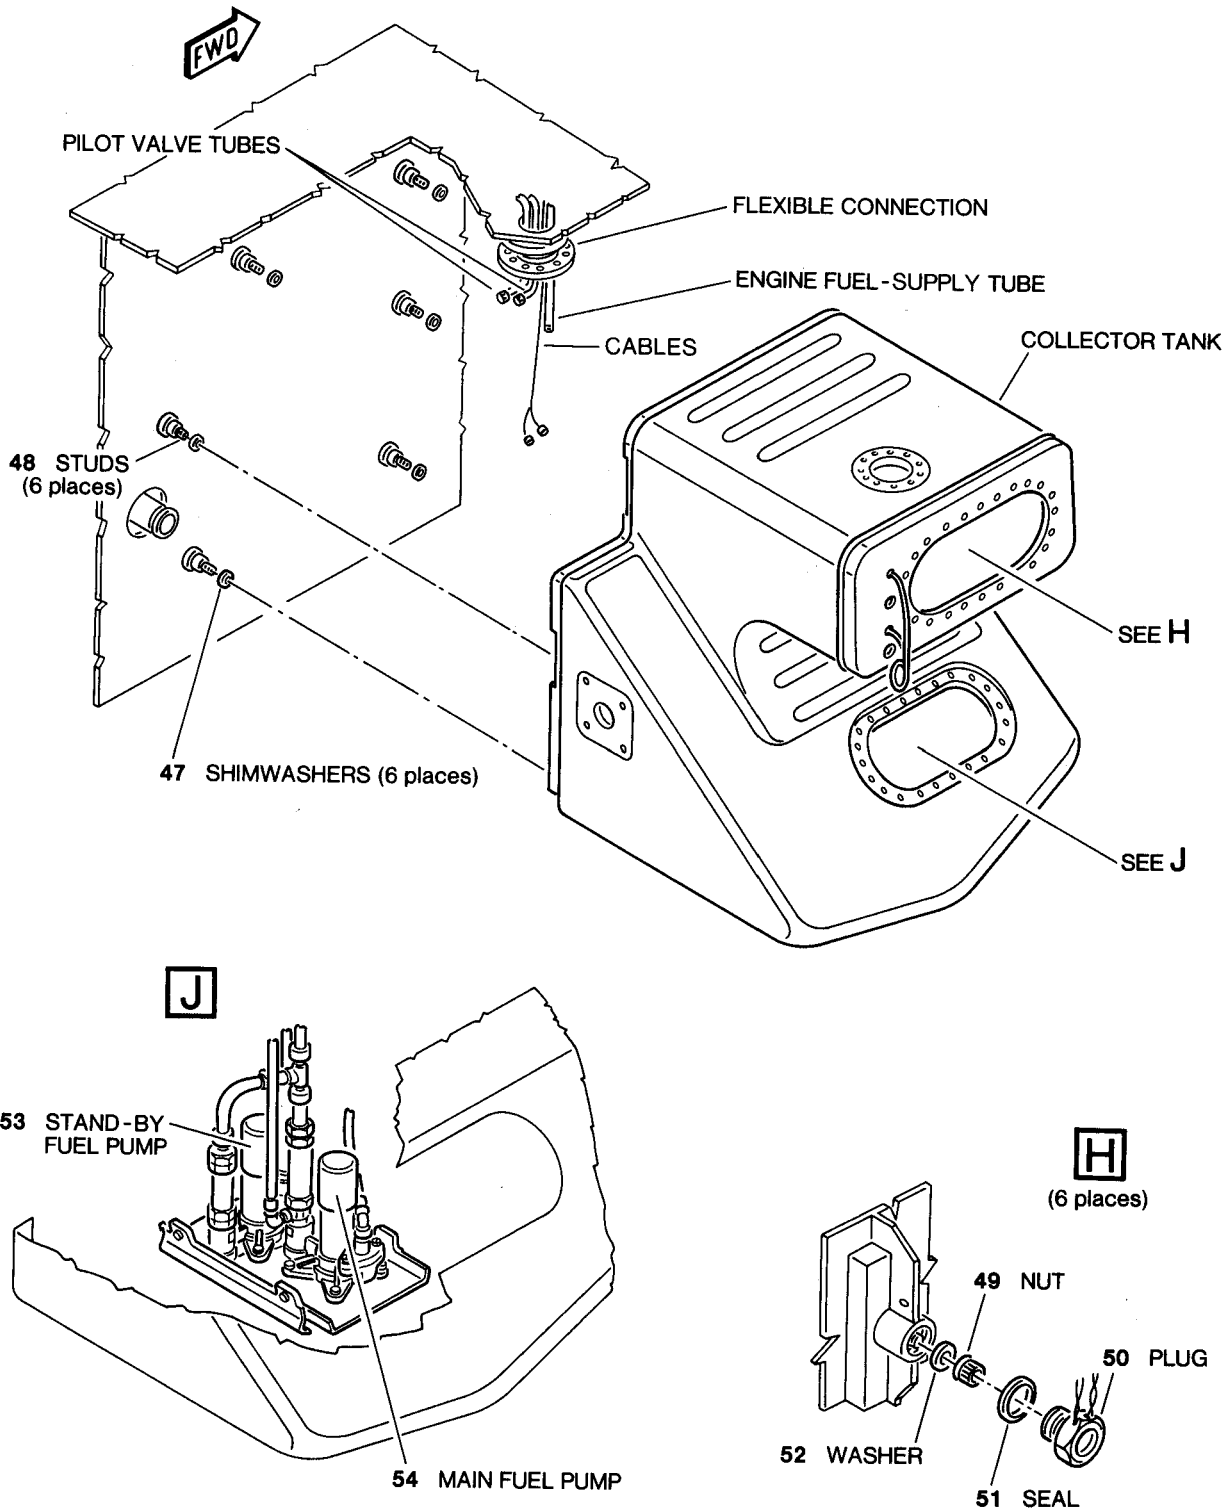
(Sheet 3) RH Fuel Collector Tank - Removal/Installatio
